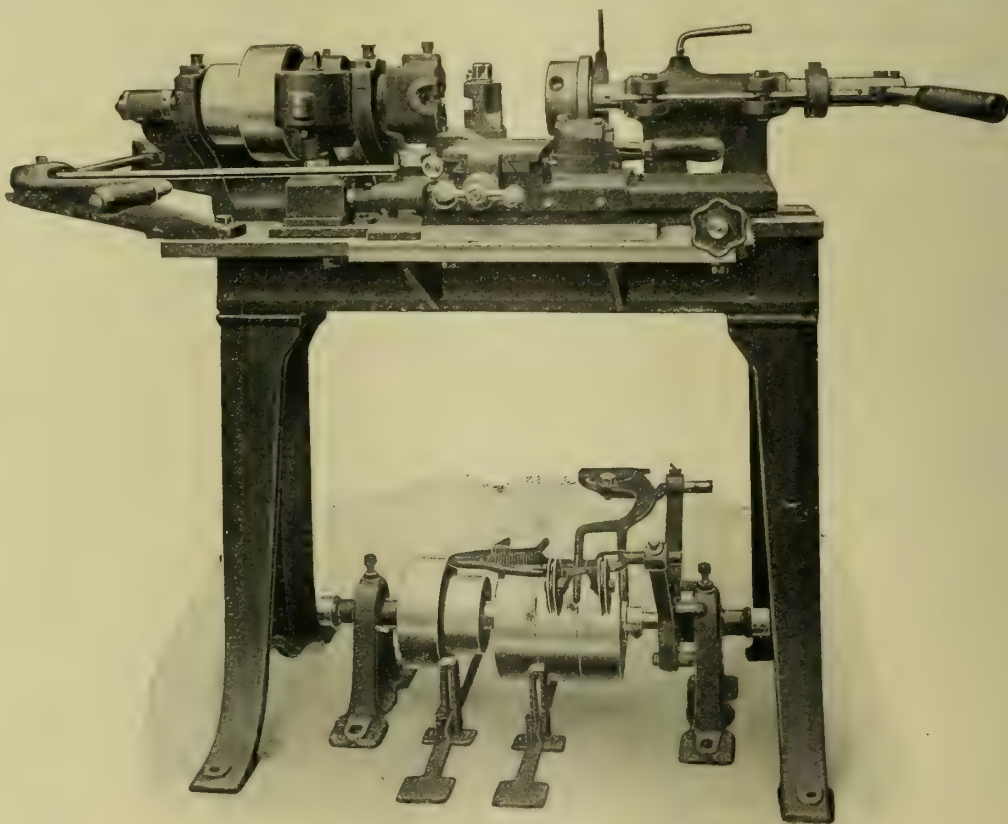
PLUGGING LATHE, SHOWN BY MESSRS. CHAS. TAYLOR (B'HAM), LTD., BIRMINGHAM.
